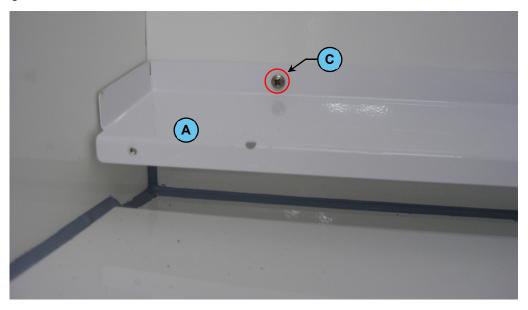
TC Back Wall Plenum Bottom Support Installed
